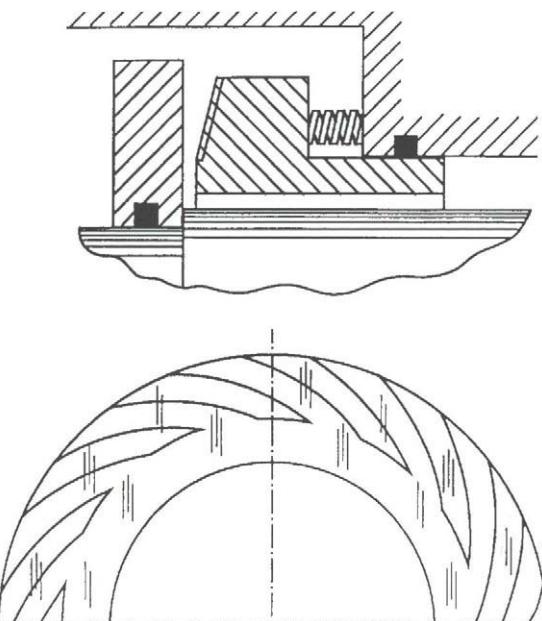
Dry gas seal. Top: typical design for curved face – spiral groove non-contact seal; curvature may alternately be on rotor; Bottom: Typical spiral groove pattern on face of seal typical non-contact gas seal (Courtesy of John Crane Co.)
